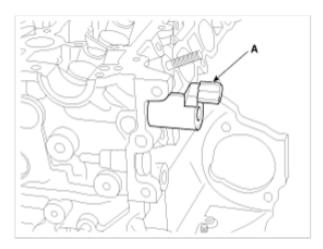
Identifying Intake Oil Control Valve Courtesy of HYUNDAI MOTOR AMERICA
